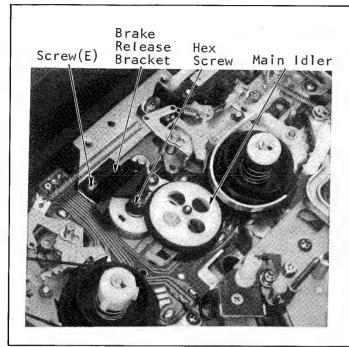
Adjustment of Cam Gear and Mode Select Switch - (11)
